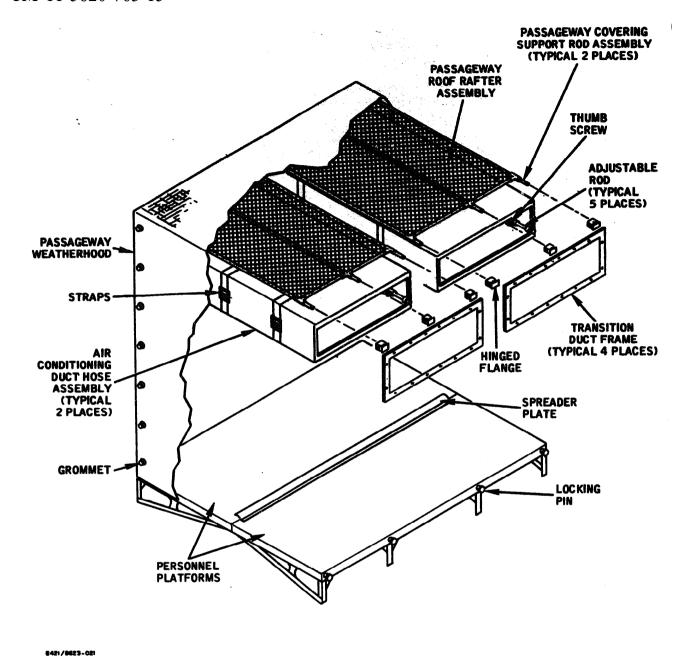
Passageway and Air Conditioner Ducts Installation.
